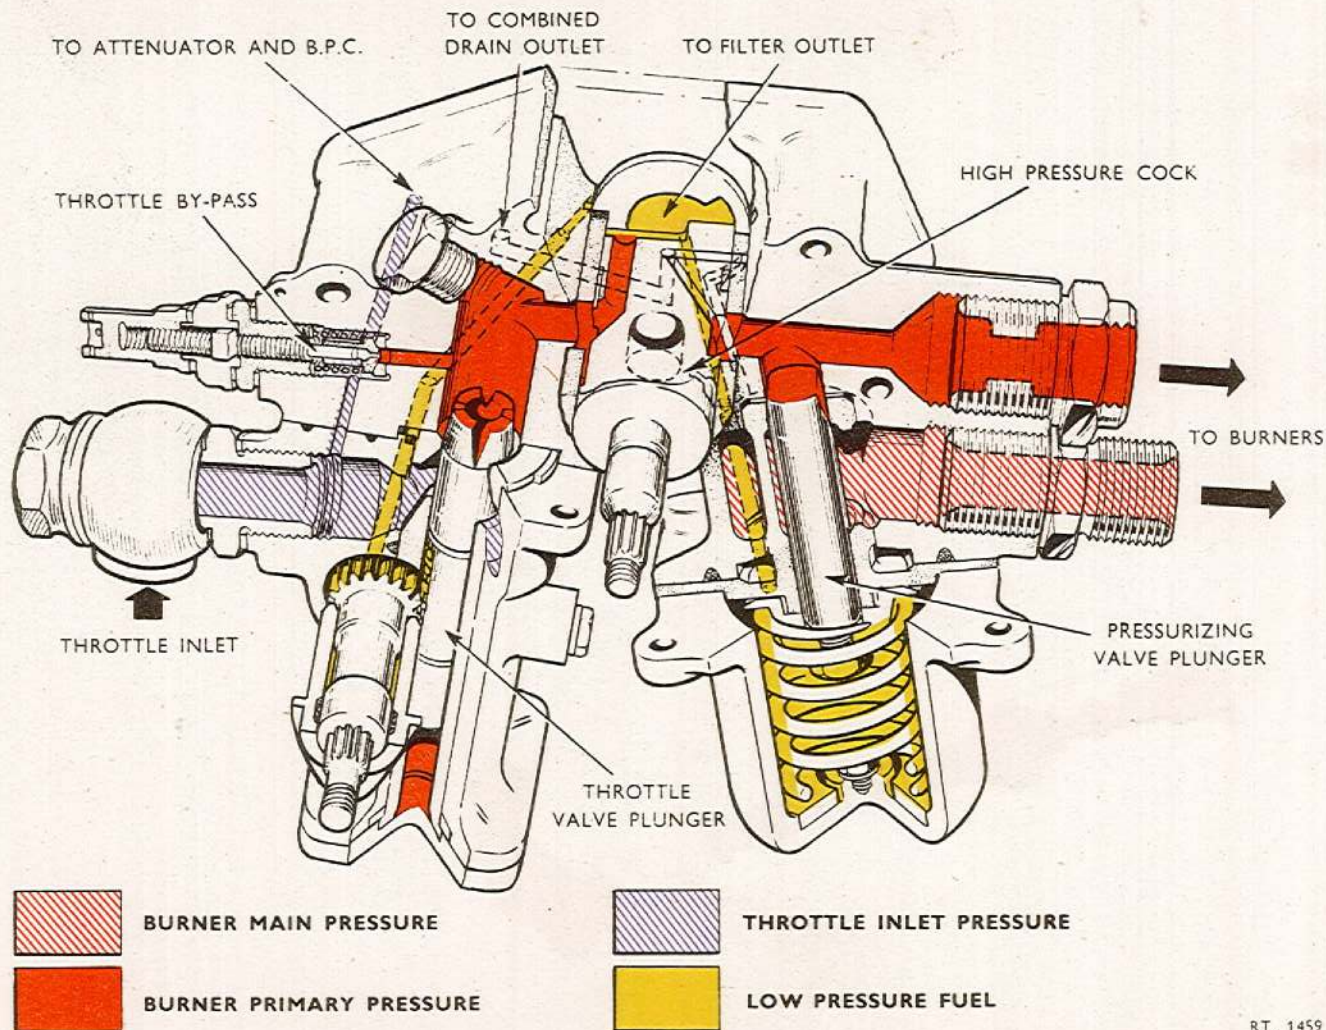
Pressurizing valve, H.P. cock and throttle valve
